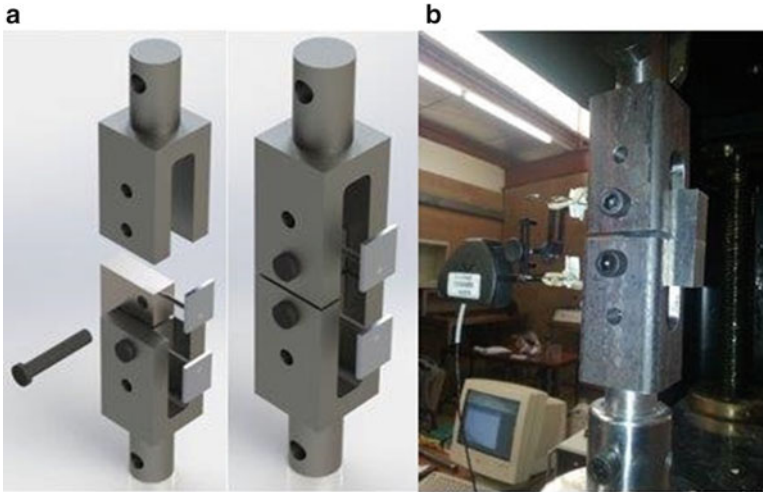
Specimen mounting arrangement. (a) 3D model. (b) Actual machine
